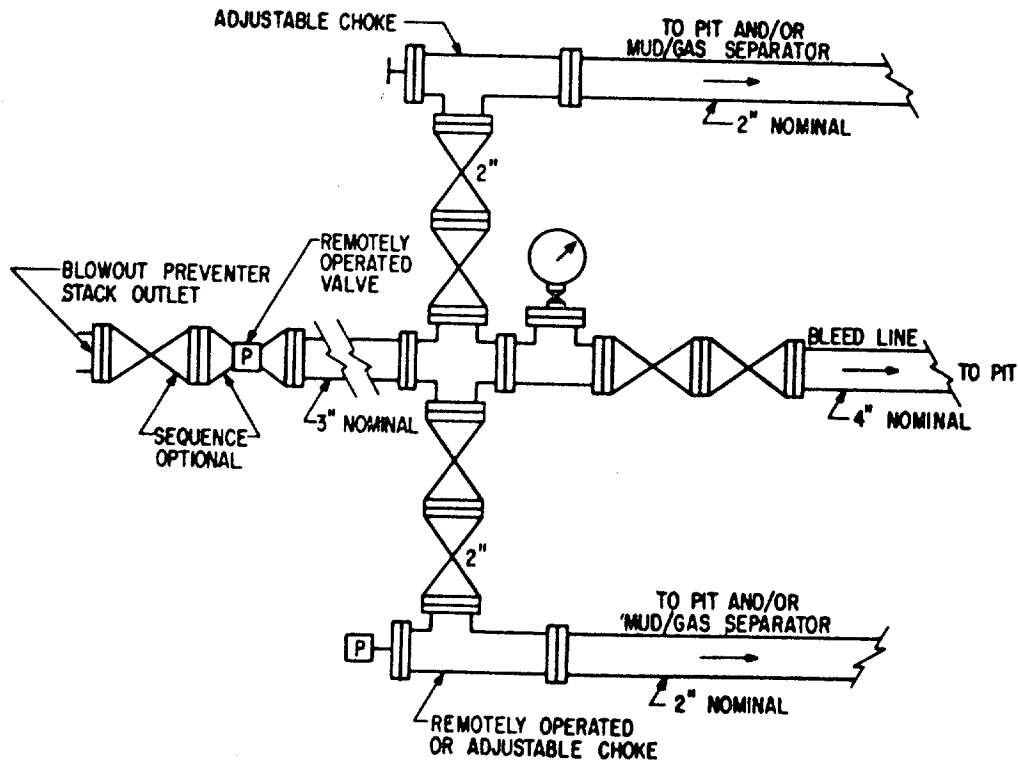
Typical choke manifold assembly for 5000 psi rated working pressure service. Courtesy American Pet. Institute, Ref. 4.1.
